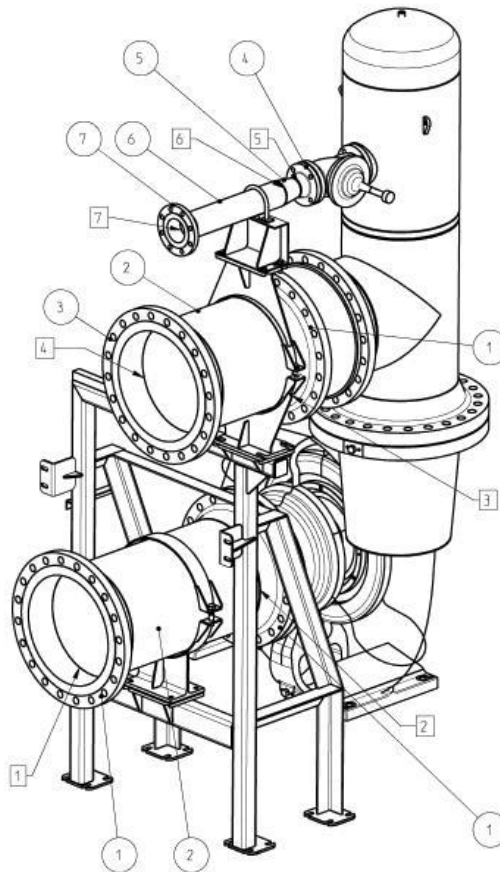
3D drawing of the hydraulic power unit
